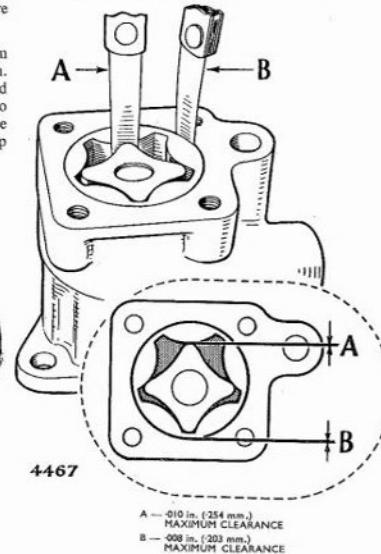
Checking side clearances of the oil pump rotor and ring
